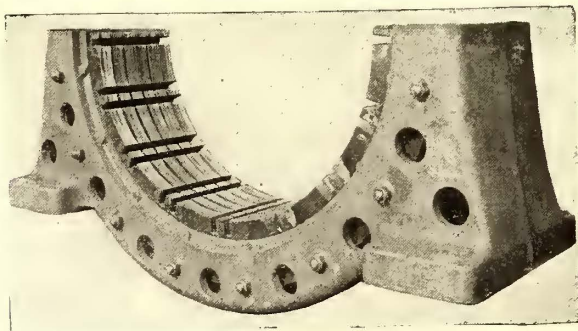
SHOWING CONSTRUCTION OF ARMATURE RING
